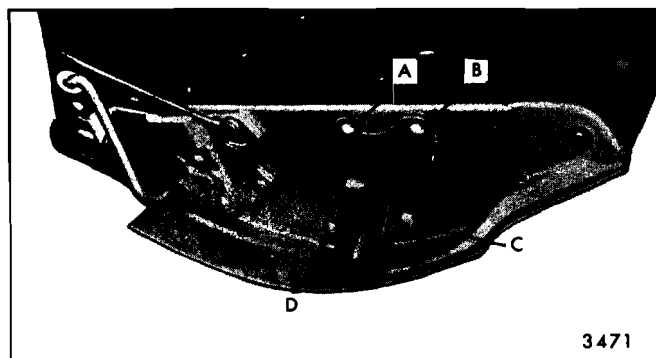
Tail Gate Left Lock Assembly - "B" Body Shown - "A" Body Typical
